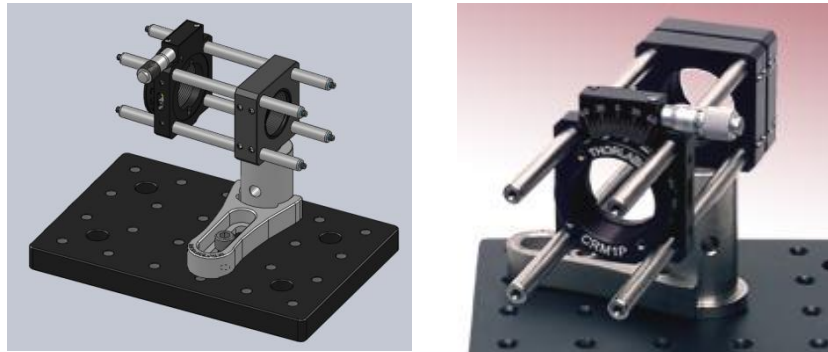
Final SolidWorks assembly and comparison to ThorLabs actual lens assembly
